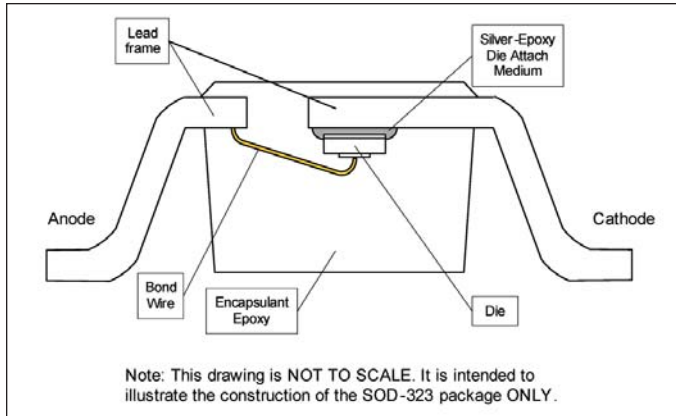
· Cross-sectional view of an SOD-323 diode assembly.
